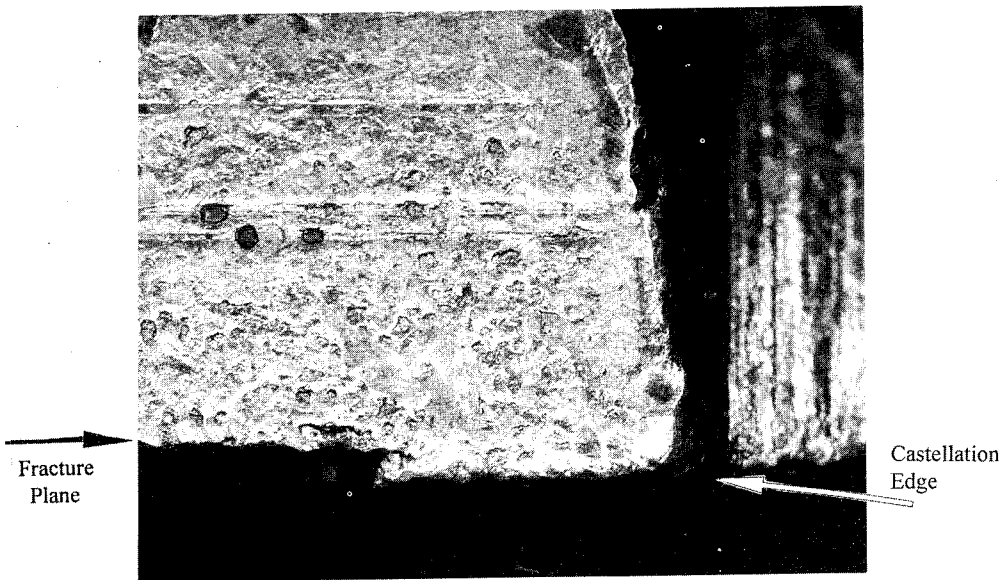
Detail of area in FIGURE 8 showing fracture surface proximity to edge of castellation. Mag. 12.5x
